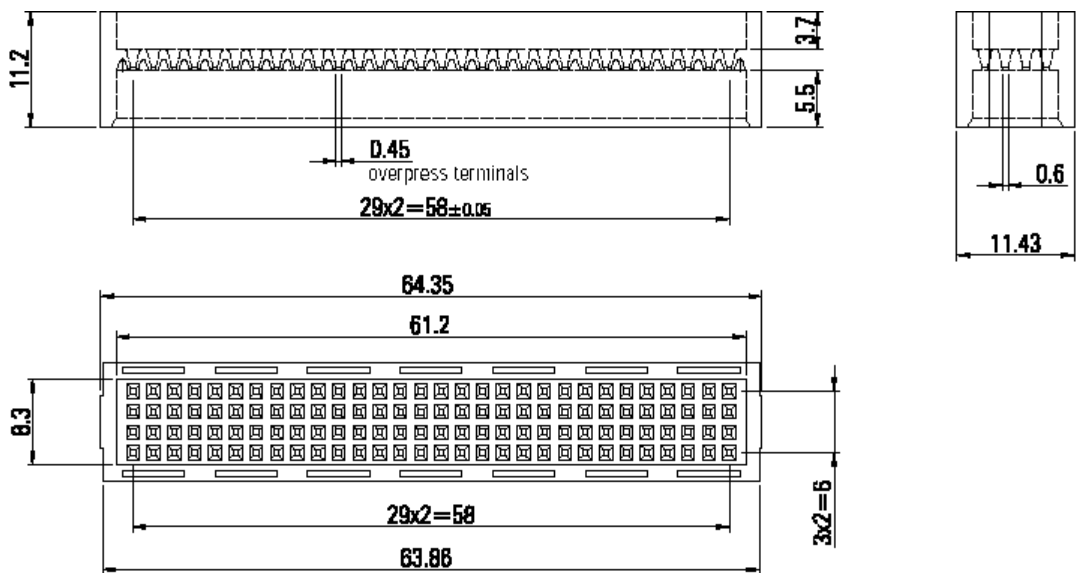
The shroud of AMI-120 matting connector drawing (EPT 264-17302)
